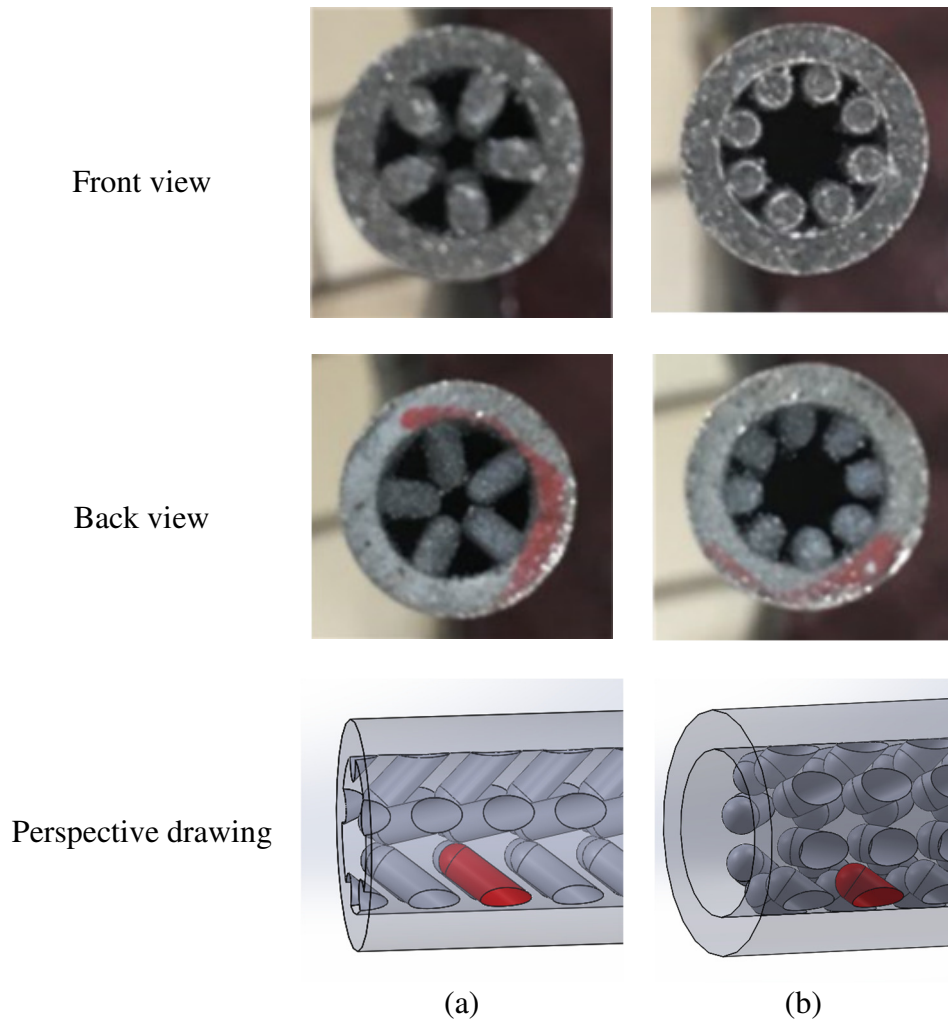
Front view, back view and perspective drawing of dome-shape pin fin tubes (a) *PF1* and (b) *PF2*.
